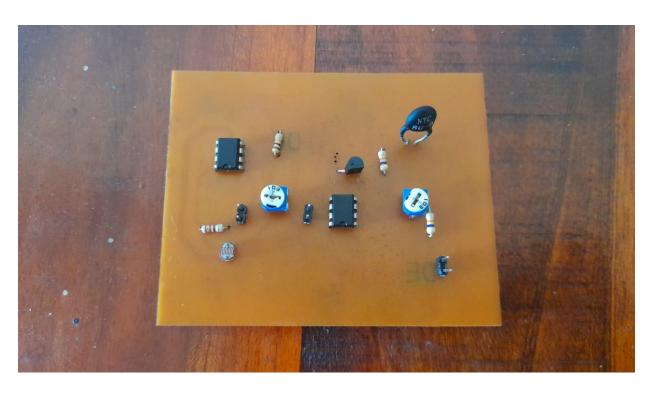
FIGURE: PLACING THE COMPONENT IN PCB BOARD
